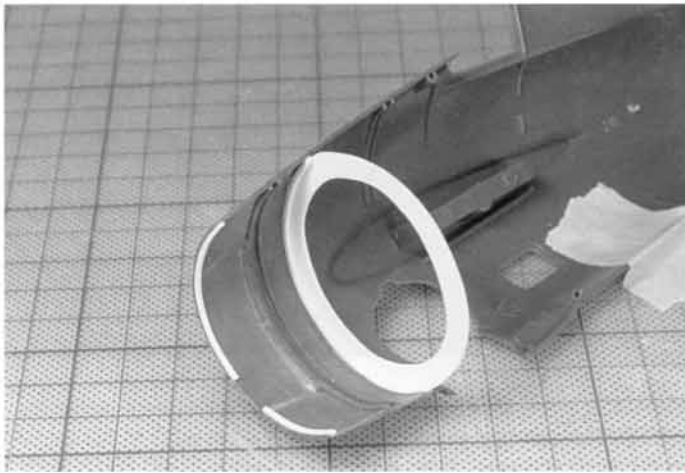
Here the interior part has been installed along the back side of the lip of the strip stock so that the strip stock will be hidden from view.
